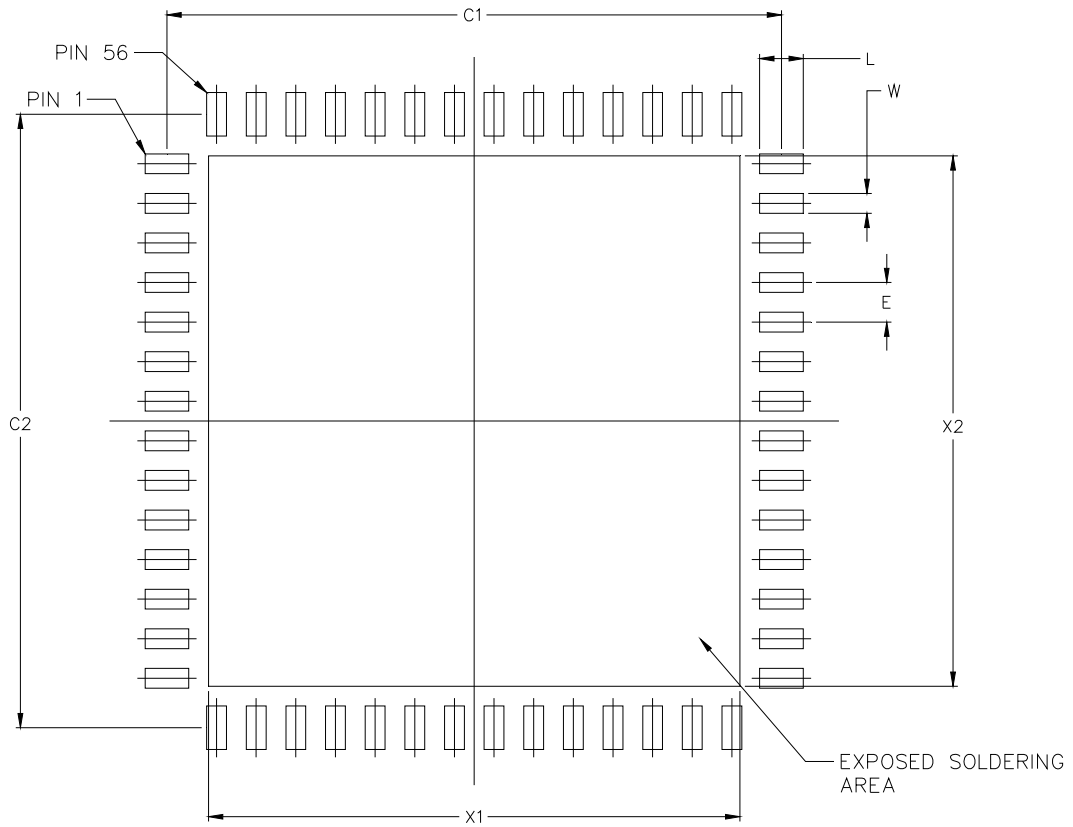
56-QFN 8x8 mm PCB Land Pattern
